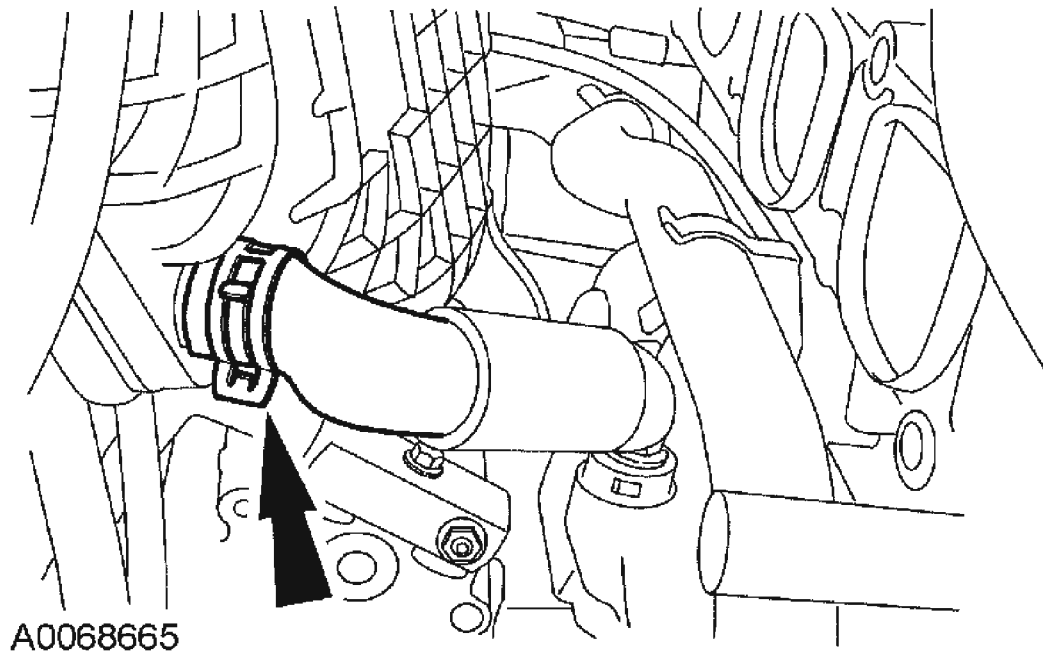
Disconnecting Positive Crankcase Ventilation (PCV) Hose And Removing Intake Manifold
